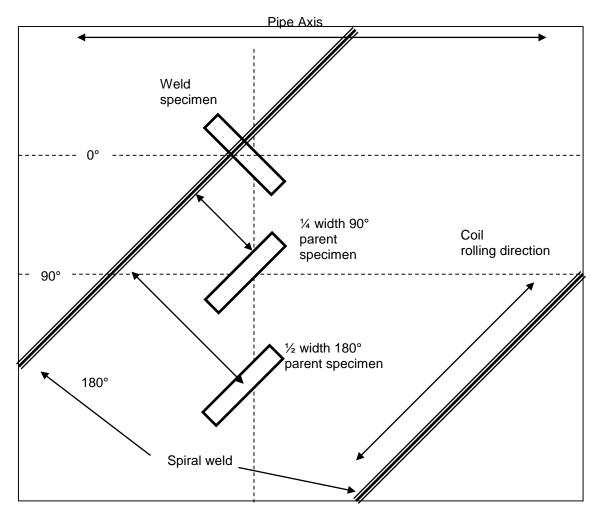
(b): Location and Orientation of Test Specimens to Be Taken from Spiral-Welded Pipe
